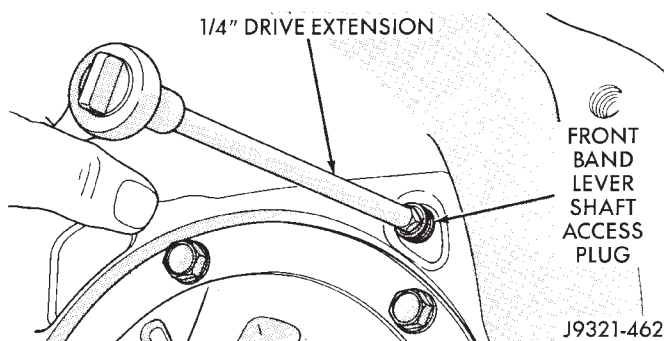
Removing/Installing Front Band Lever Shaft Access Plug
